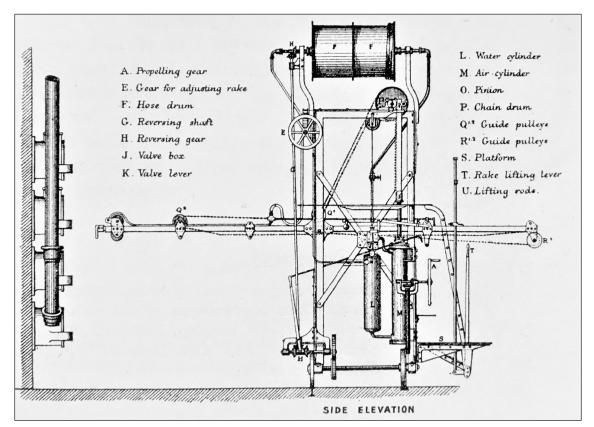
West's compressed air drawing machine. Image courtesy of IGEM Archive.
